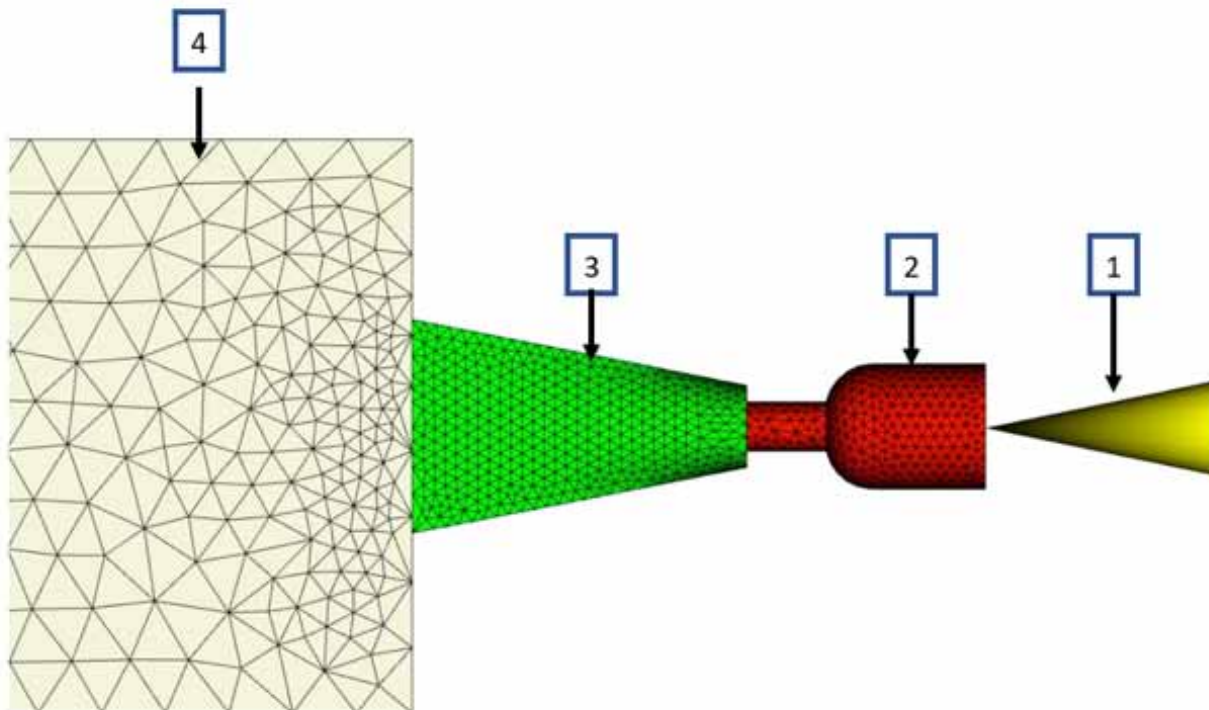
Section view of type of mesh used for injection, compression molding. (1) Injection location, (2) Hot runner, (3) Fan gate, (4) Specimen part
